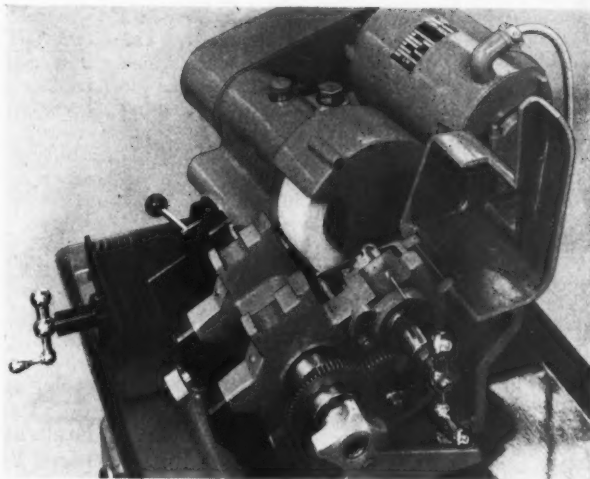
Close-up view of the tap sharpening machine showing the change gears on the work-head which provide for different numbers of plunge-movements during one revolution of the work
